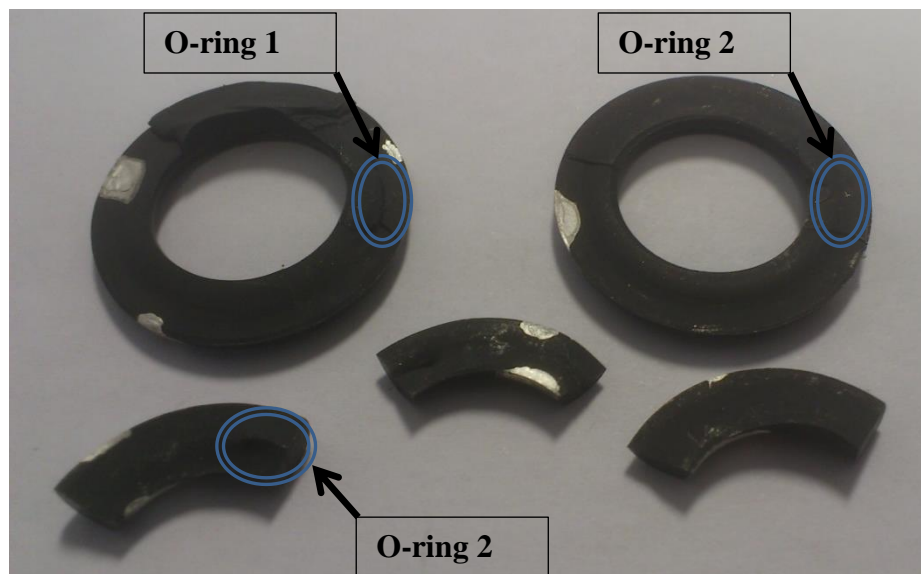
Fractured O-ring specimens showing the location of three sections containing crack initiation and crack propagation regions.
